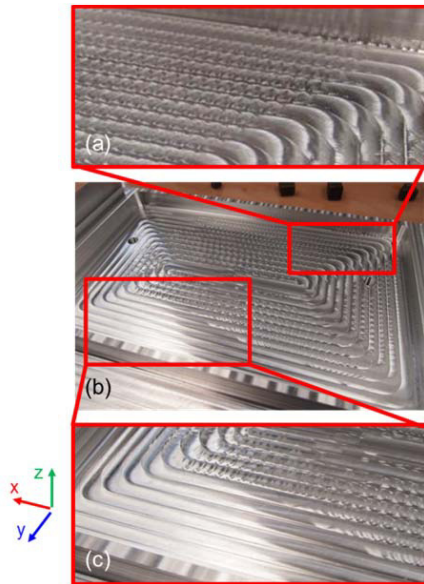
Chatter marks in the rear pocket at a critical pocket depth; (a) chatter marks in upper right corner, (b) complete rear pocket, (c) smooth surface in left part of the rear pocket
